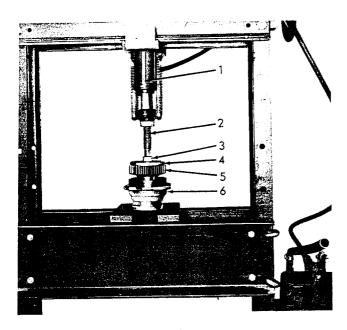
Installing Input Shaft in Bearing Retainer (T-35051)
